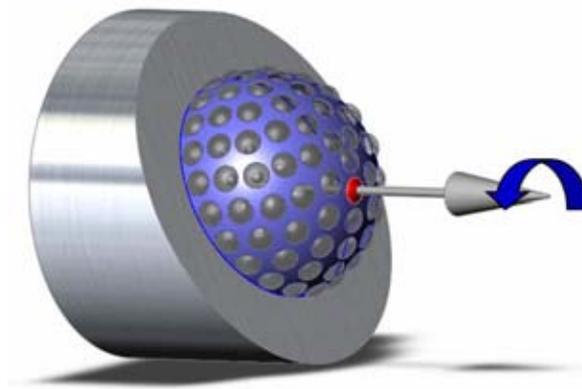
On-Center Machining of the Dragonfly Eye Would Require the Part to be Repositioned in Both Axis and Elevation for the Machining of Each Lenslet
